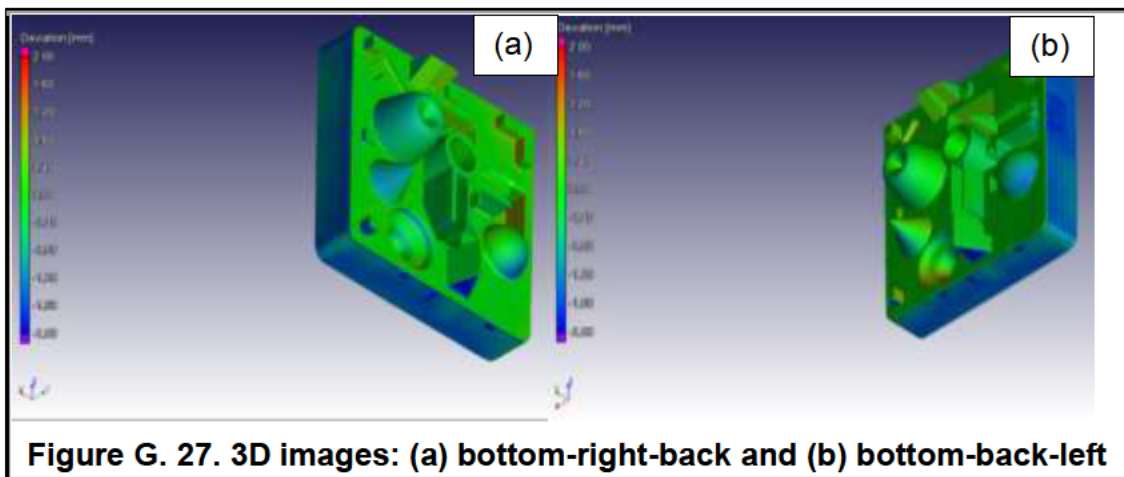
3D images: (a) bottom-right-back and (b) bottom-back-left
